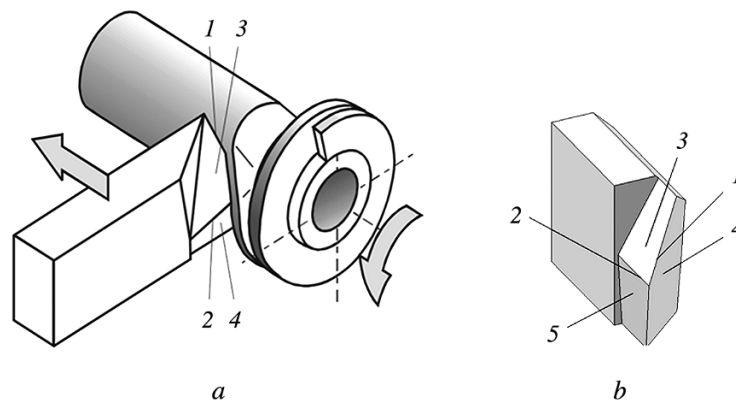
Scheme for forming fins on tubes by the DC method (*a*) and tool for its implementation (*b*): 1) cutting edge; 2) deforming edge; 3) front surface; 4, 5) main and auxiliary back surface.
